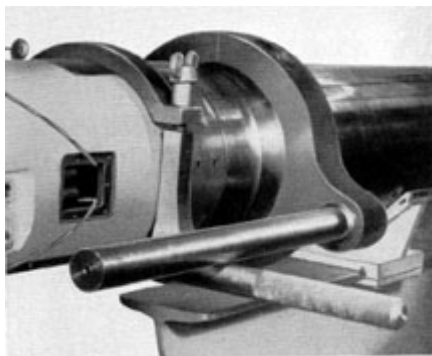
Eyepiece box and outer tube alignment guide handles in contact.
